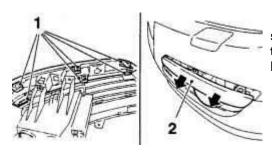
To remove the pads to squeeze the latches on the back of the lid rear bumper: 1 - latches, 2 - lining
